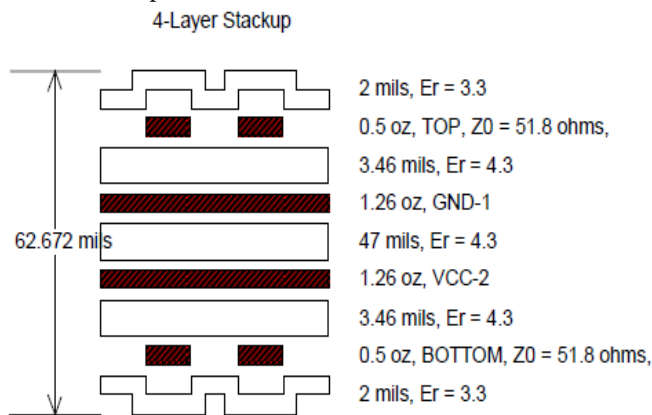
Standard 4 layer stack up with 63 mil board finishing
